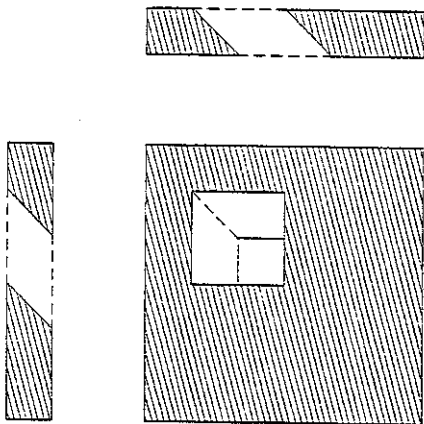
CAD drawing of the geometry after the first exposure producing a valve seat.
